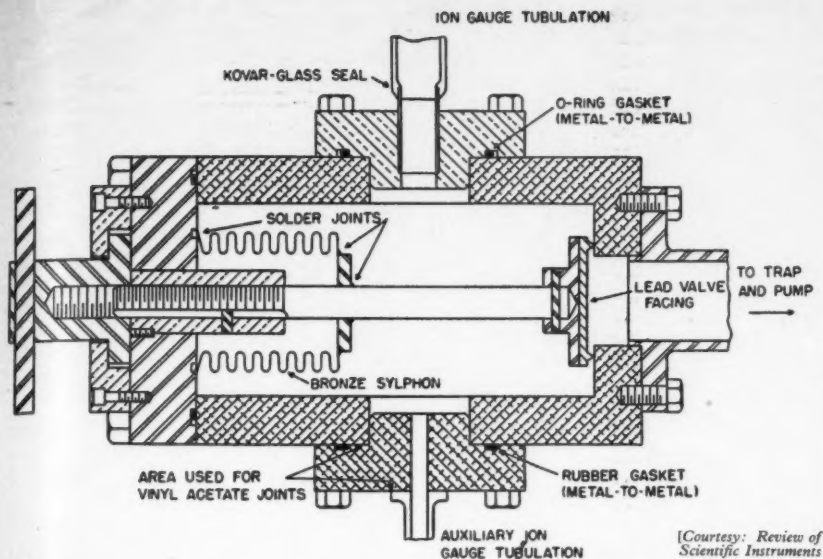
Sectional view of vacuum chamber illustrating different types of gasketed flanges.
